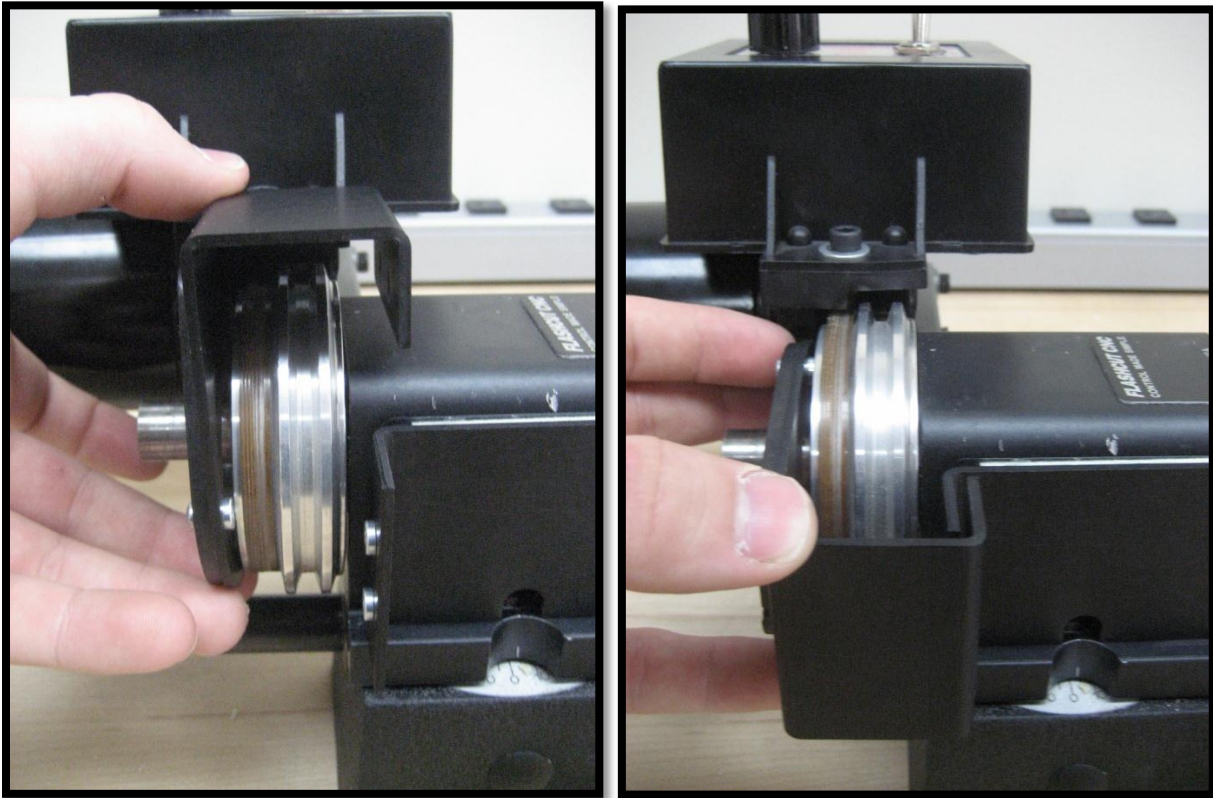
Large Encoder Bracket with base of Encoder Assembly attached.
